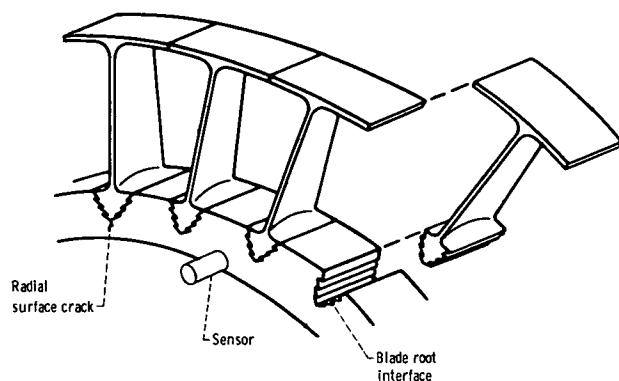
Typical turbine wheel segment showing location of a radial surface crack and position of sensor.
